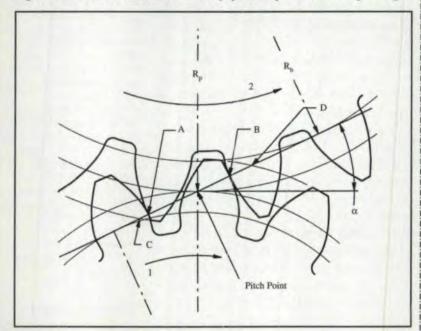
Base tangent line. Courtesy of Van Gerpen and Reece Engineering.
